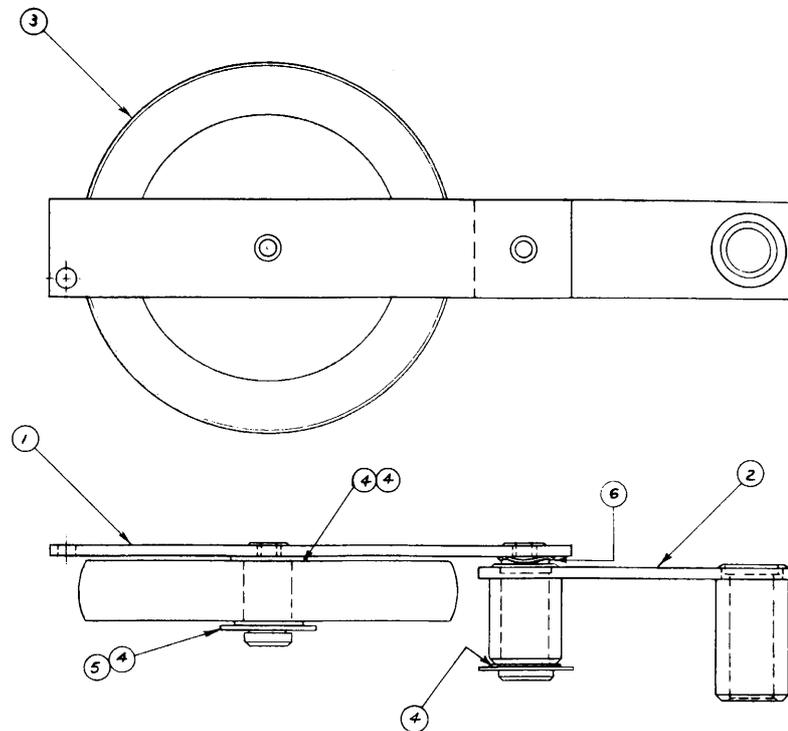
Pressure roller assembly, WW-3844-1B (part of motorboard assembly, figure 6).
